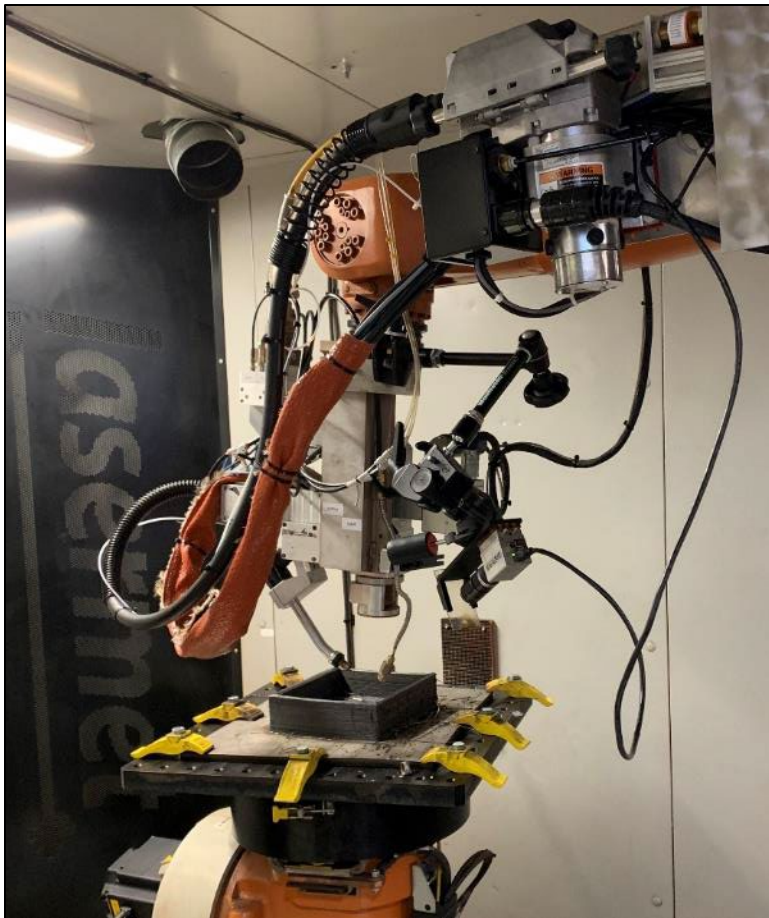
Welding robot and tilt-rotary table used for DED test part.
